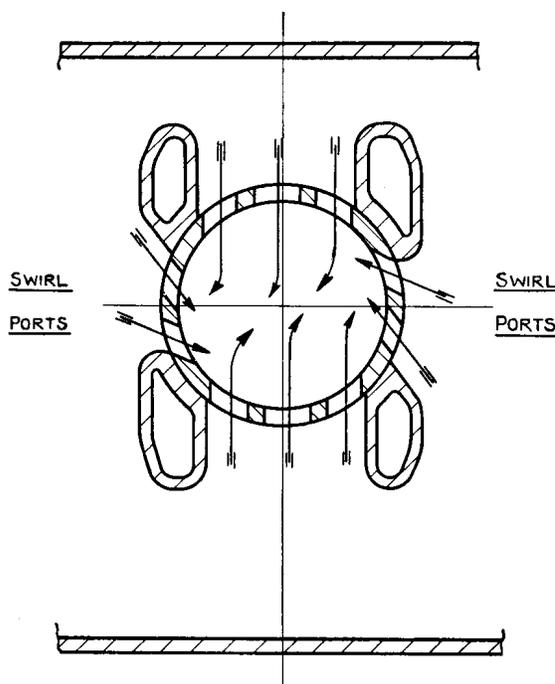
Inlet Ports of Petter Superscavenge Engine. In this section through cylinder and liner arrows indicate the believed air flow causing rotation of charge.
